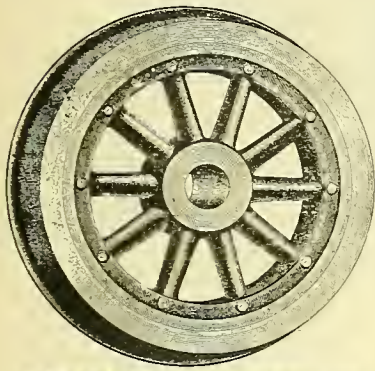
No. 1. Wheel with Paper Center. Tire secured by Plates and Bolts.
